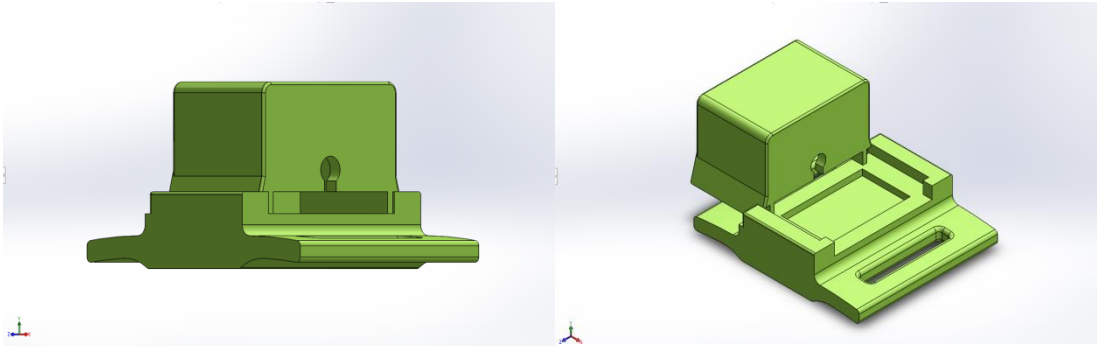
Assembly of MPU Casing with Slide-fit Protective Top
